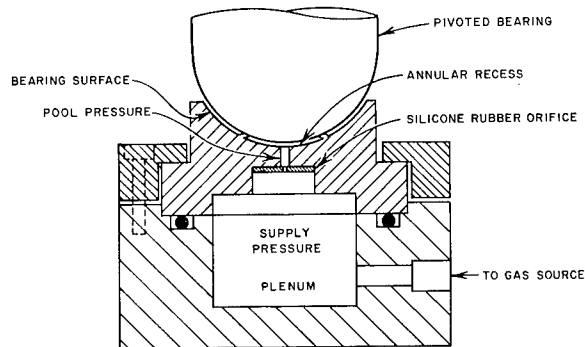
Assembly of gas-lubricated bearing regulated by an elastic orifice.
